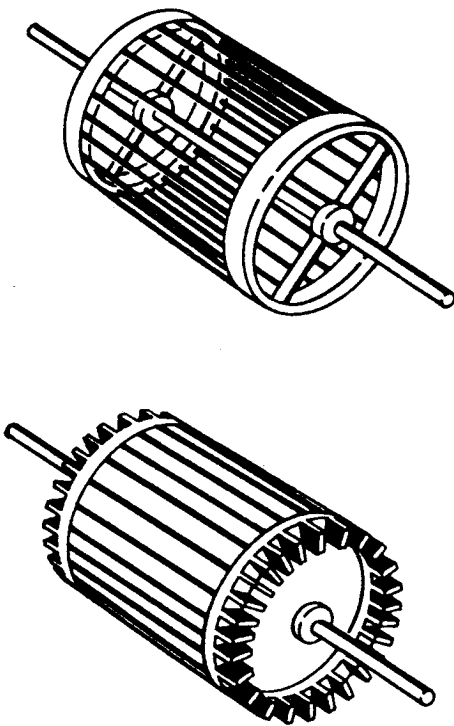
Squirrel Cage Induction Motor Rotor.
